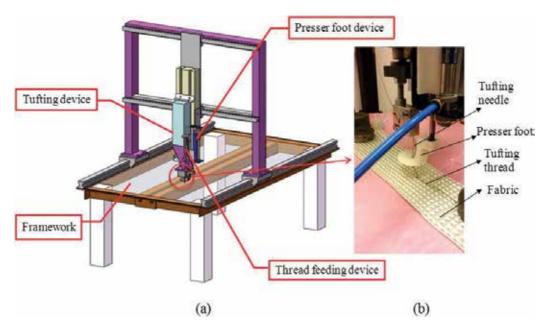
The tufting equipment (a) and zoom of the tufting head (b).
